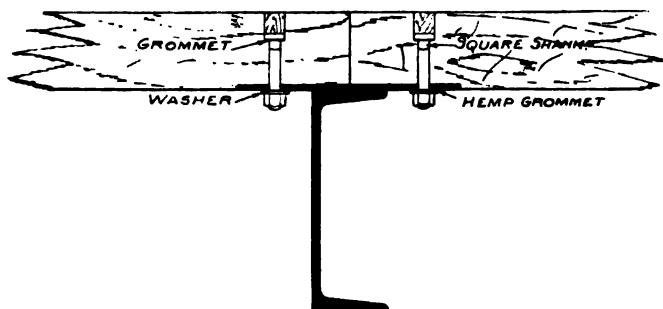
METHOD OF FASTENING DECK PLANKING WHERE THERE IS NO PLATING.
